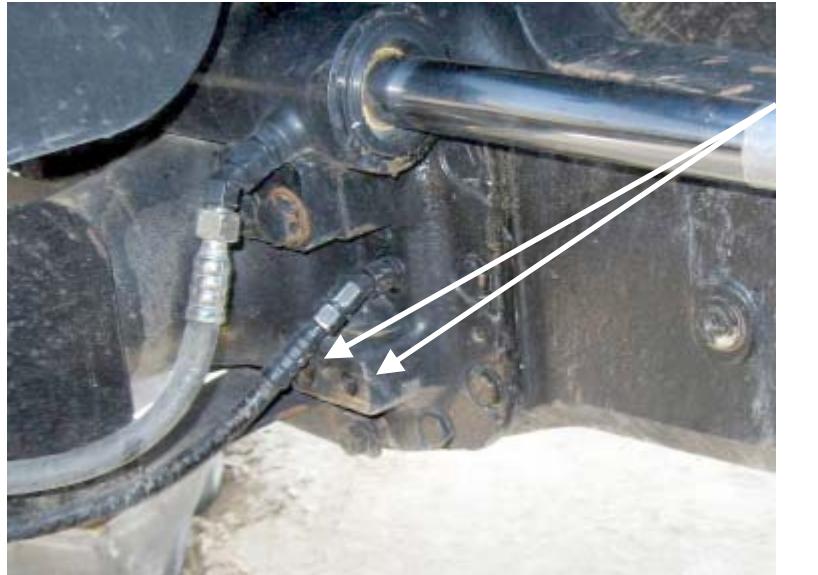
Wheel Angle Sensor Linkage Rod Bracket Mounted
